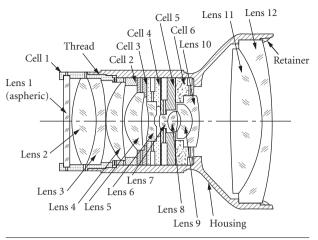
A projection lens comprising a stack of "poker chip" lens/cell subassemblies inserted into the bore of the mount. (*From Fischer*.¹⁹)
